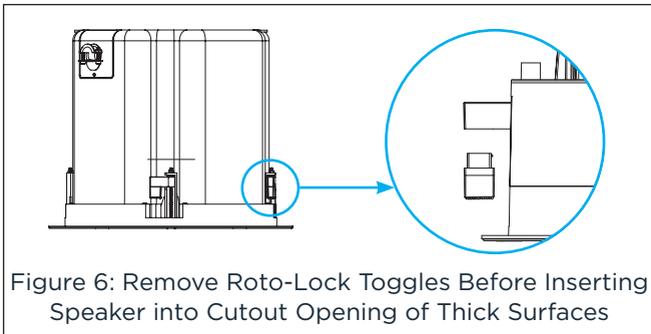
Remove Roto-Lock Toggles Before Inserting Speaker into Cutout Opening of Thick Surfaces
